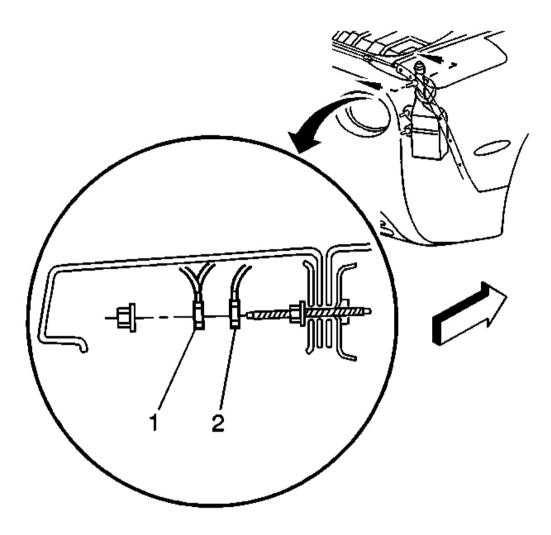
Antenna Ground Connector At Rear Body Wiring Harness Courtesy of GENERAL MOTORS CORP.
